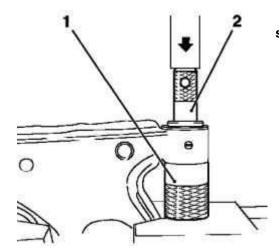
Extrusion front damping sleeve: 1, 2 - a special tool
